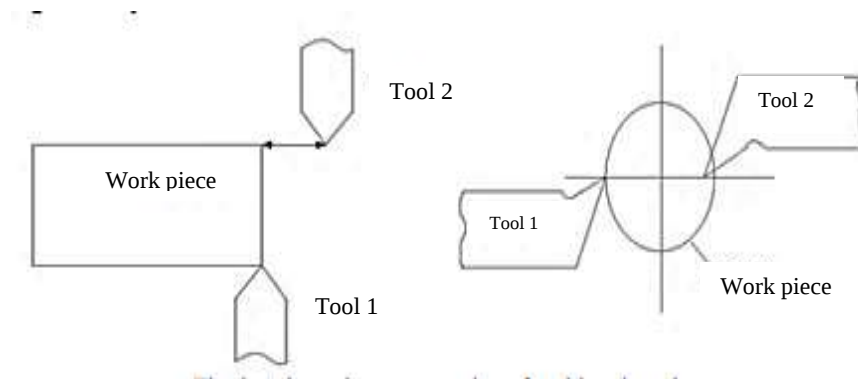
Schematic representation of the double cutting tool (Trikal et al., 2016)
